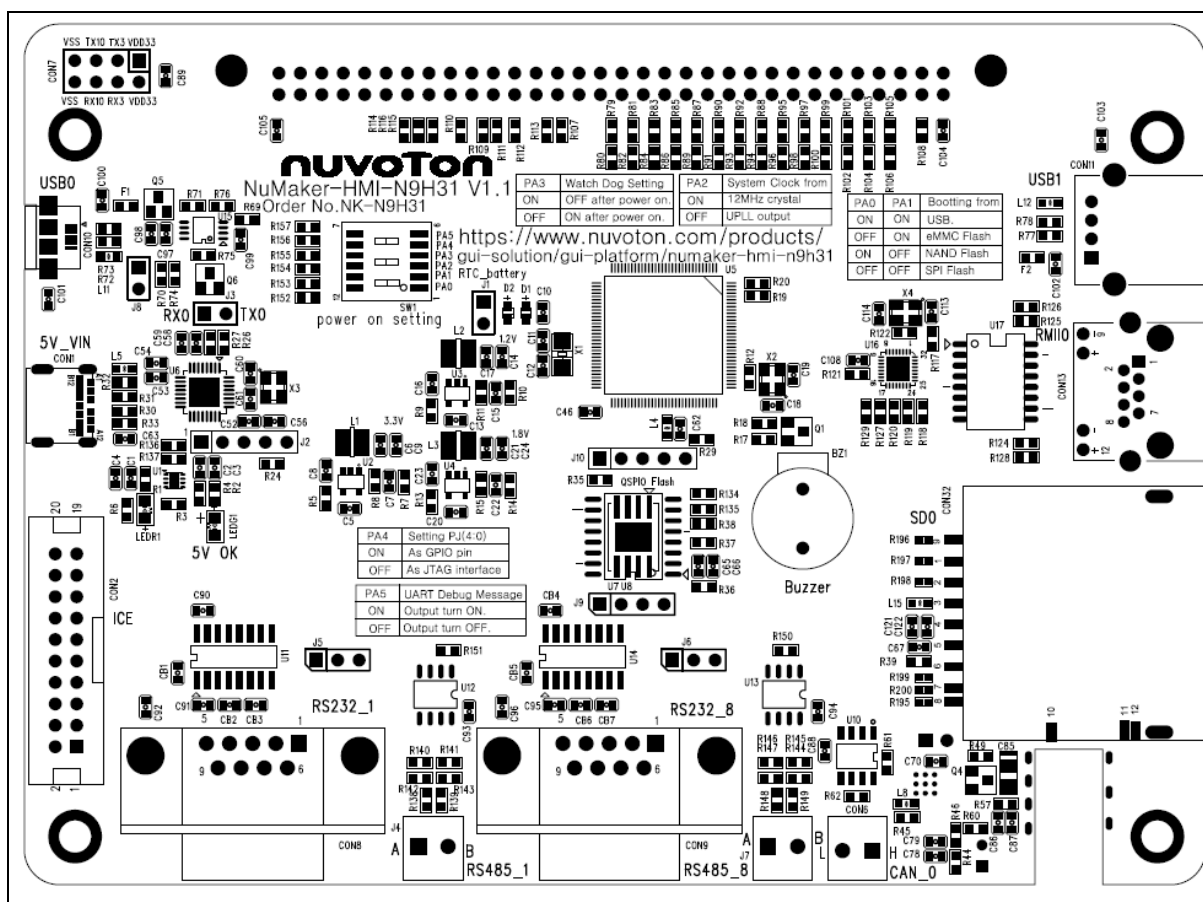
Rear Placement of NuMaker-HMI-N9H31 Board
